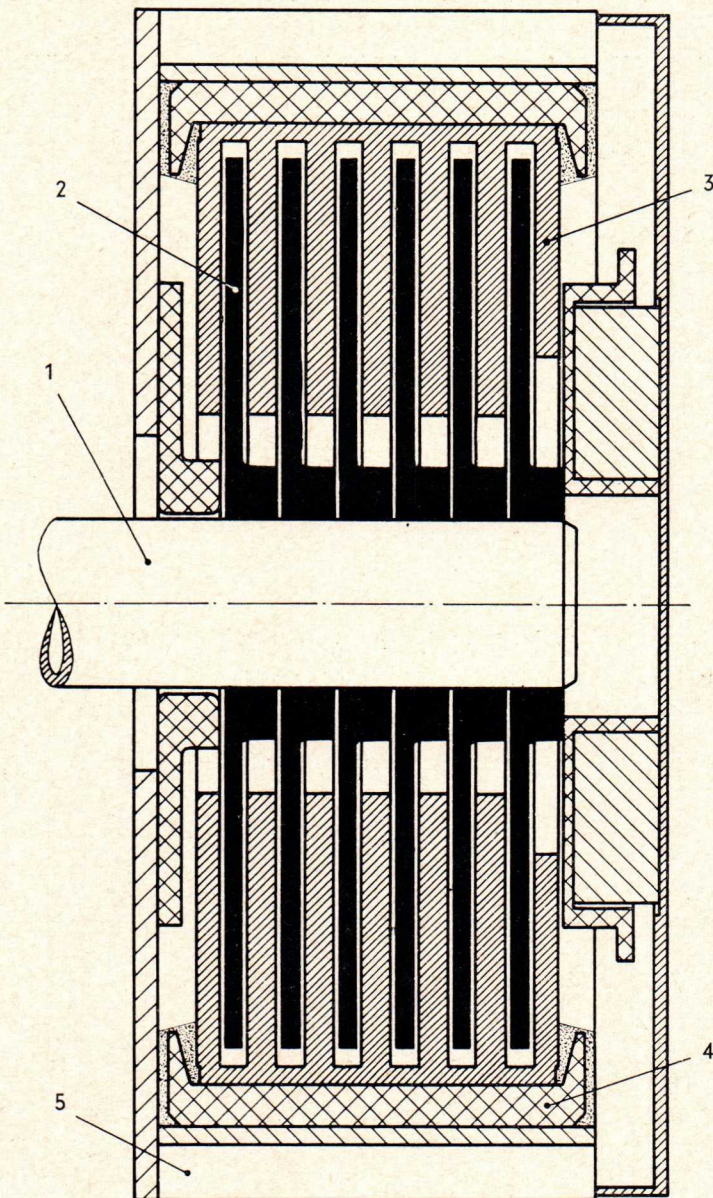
Sectional drawing of a conduction-cooling assembly for the MRW 21
